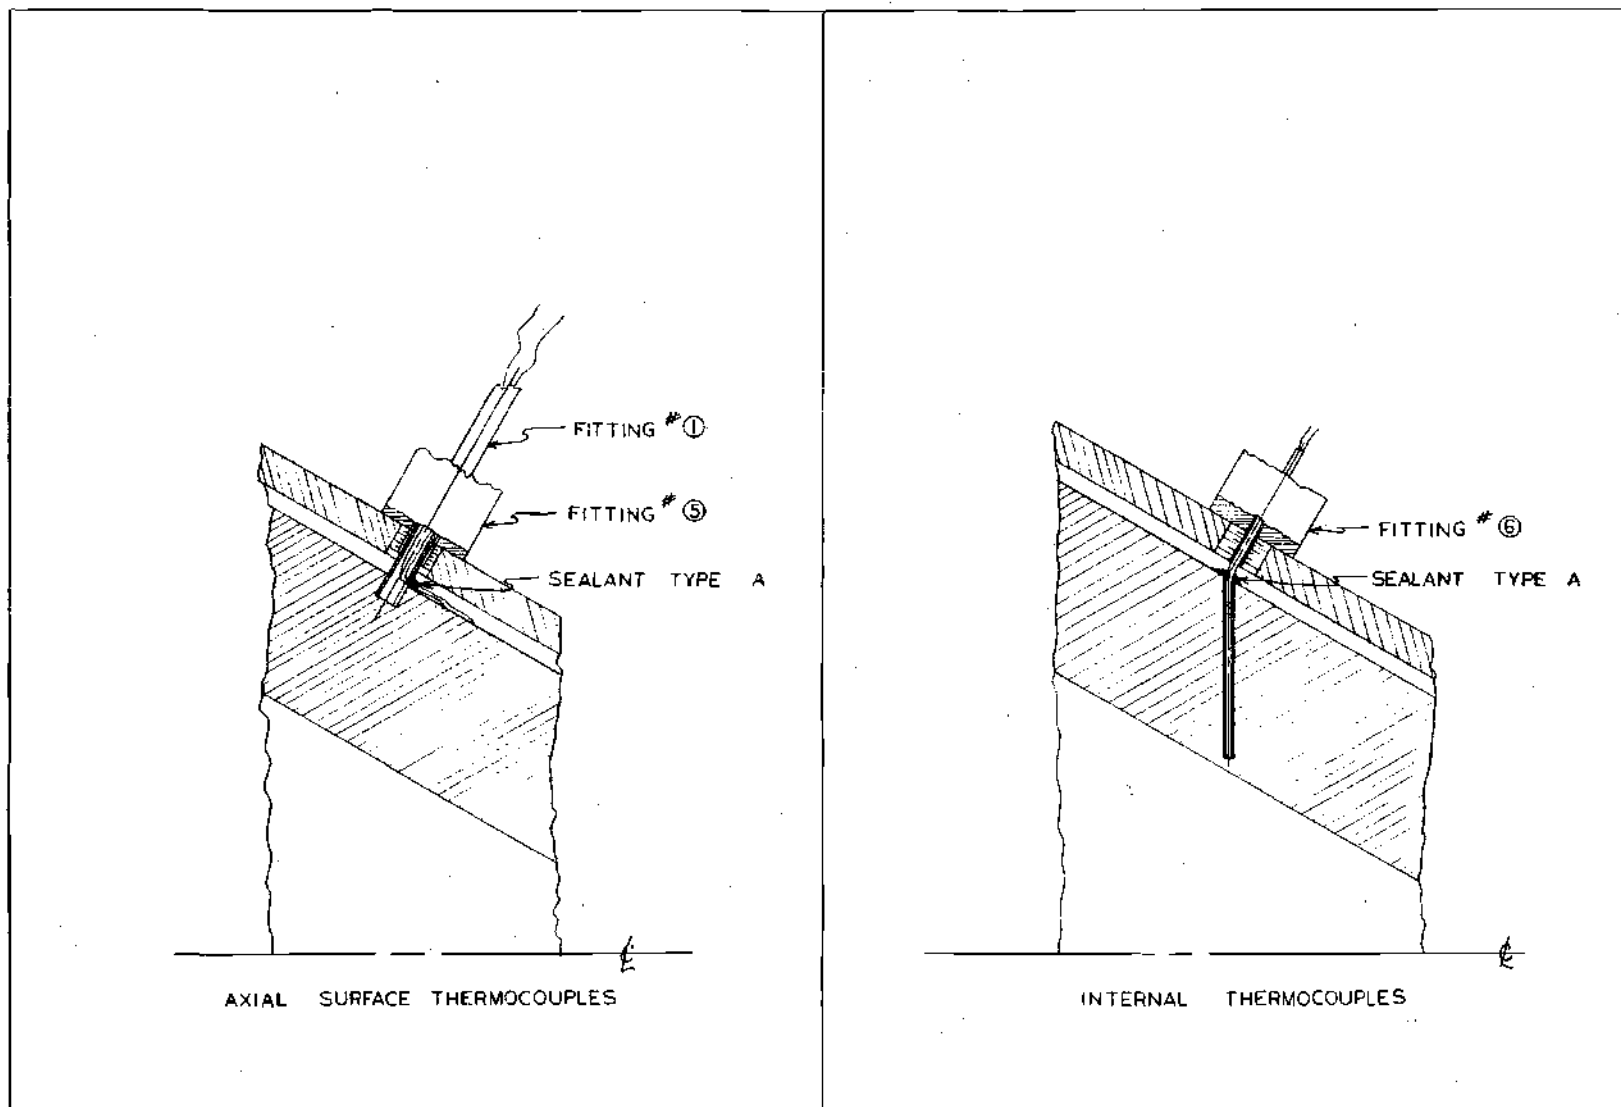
THERMOCOUPLE MOUNTING DETAILS
